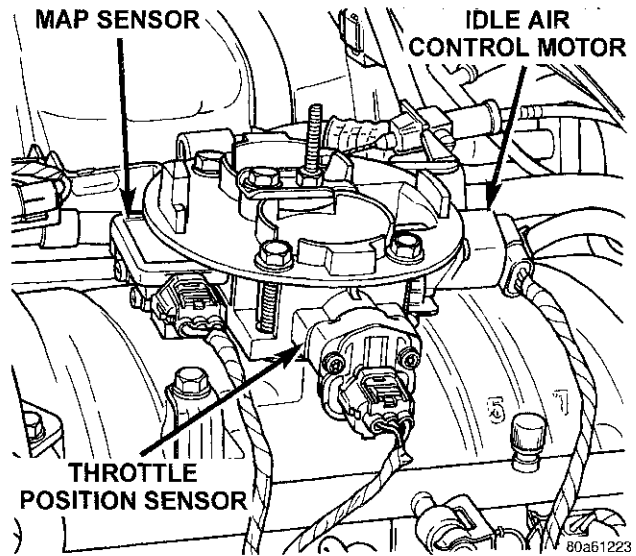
Sensor and IAC Motor Location—Typical (V-8 Shown)
